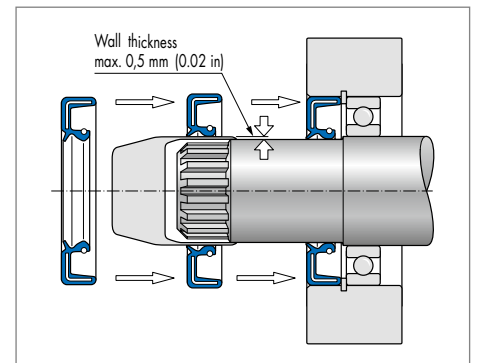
Installation over a shaft with a keyway (also for a sharp-edged shoulder on shaft)
